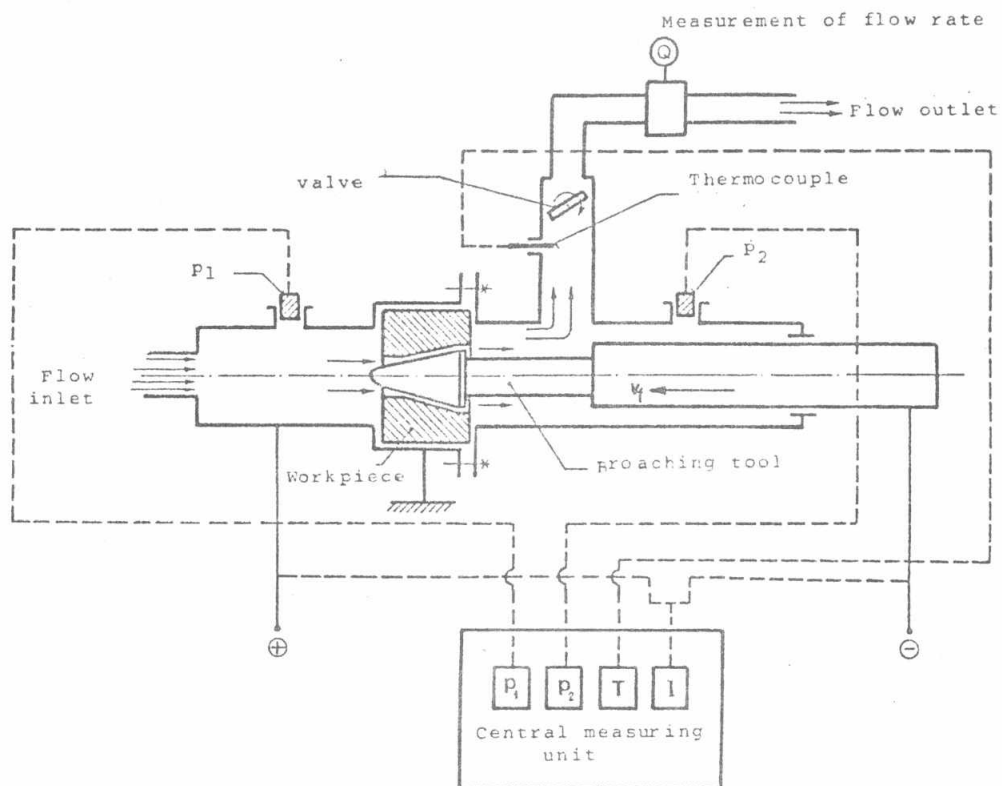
Schematic drawing of ECB cell with all measured parameters.
